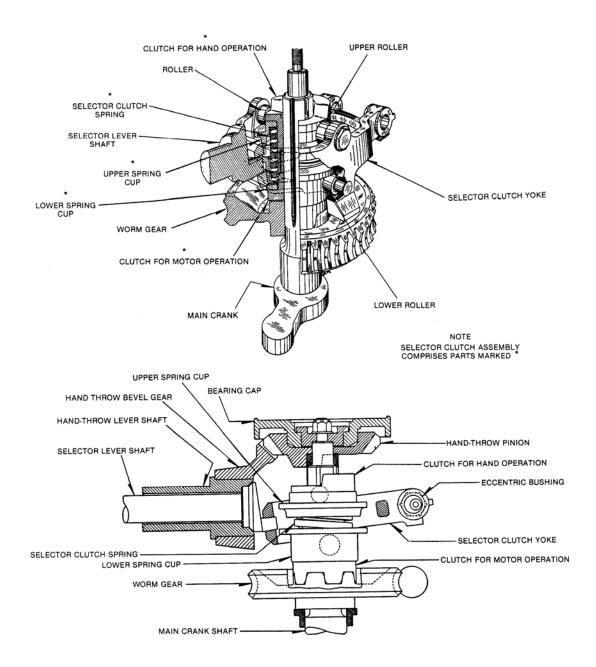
Sectional Views of M-23A Dual-Control Mechanism
